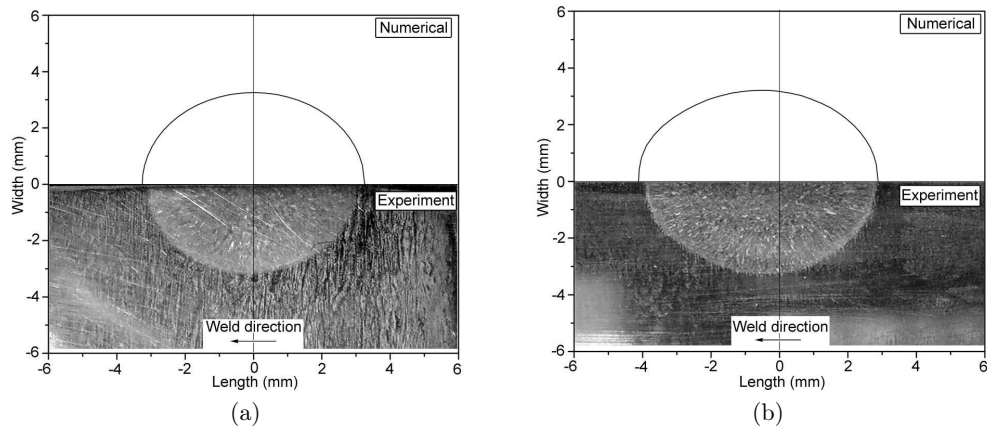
Weld pool width on top of the workpiece for torch angles (a) 90° (b) 70°
